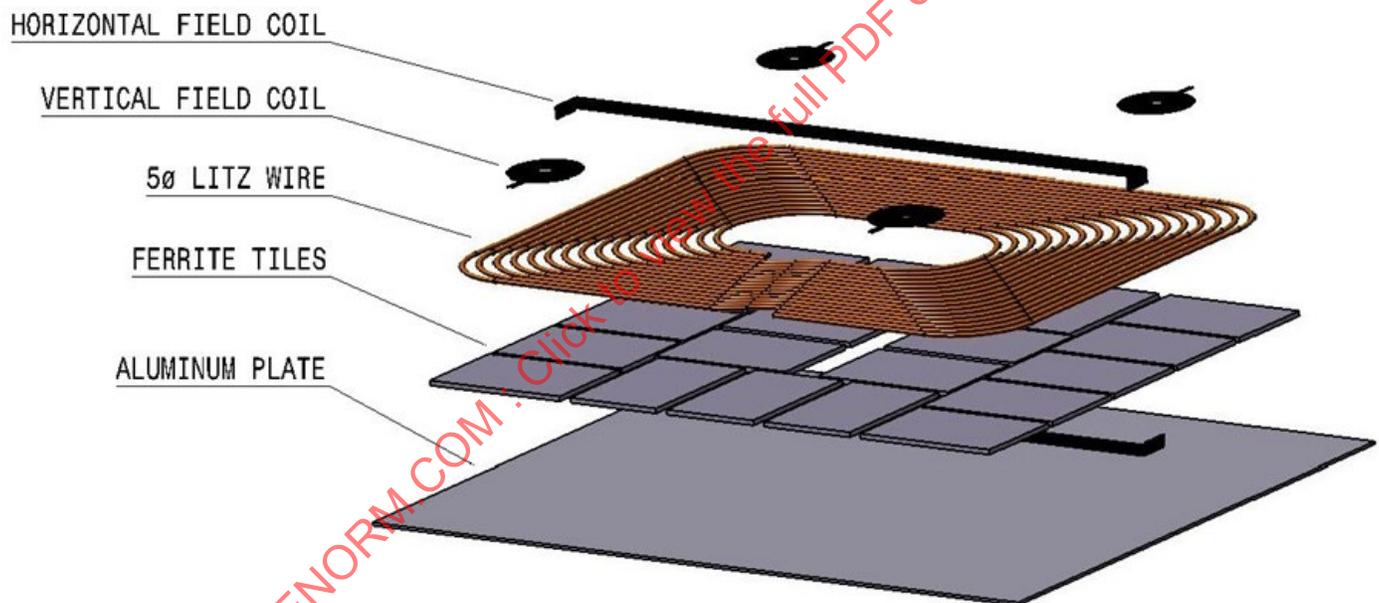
Exploded view of an example of a DIPS-Enabled GA
